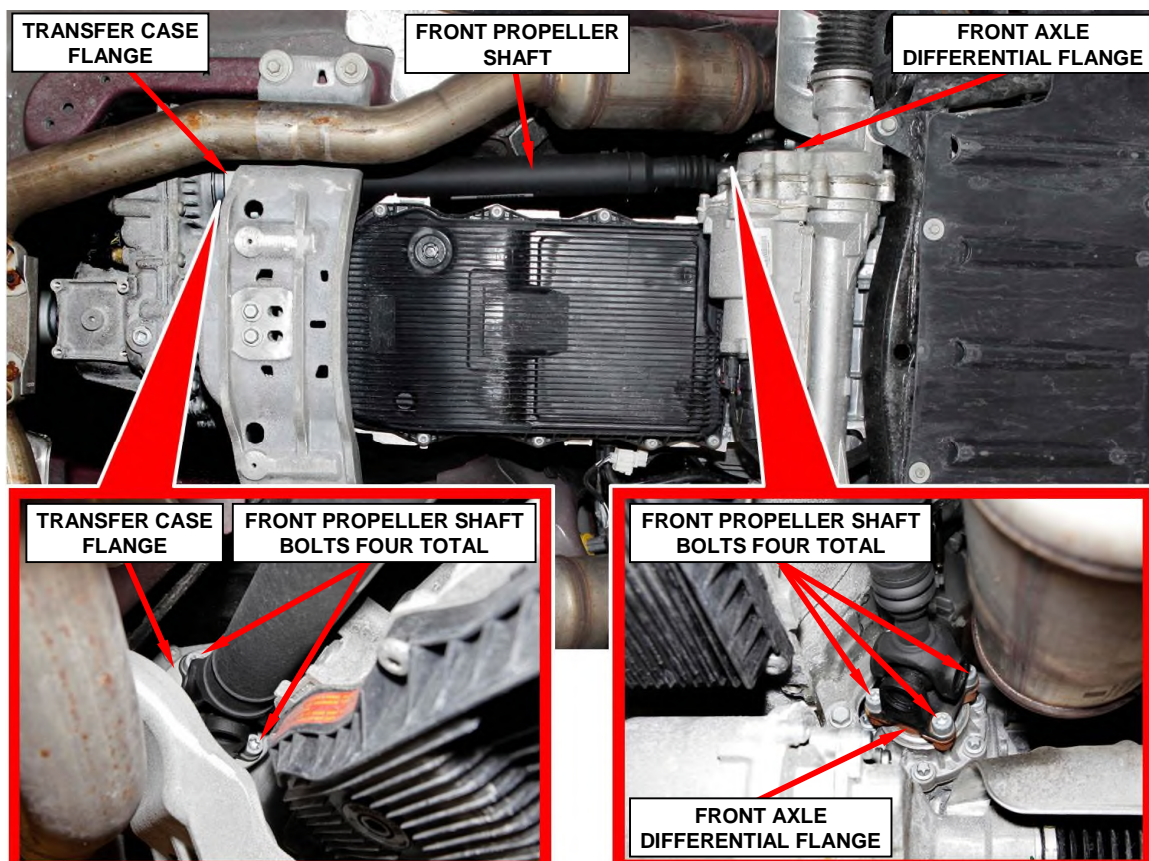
Front Propeller Shaft Bolts at Front Axle Differential and Transfer Case
